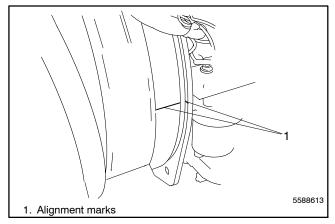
Alignment Marks on Stator and Engine Adapter
